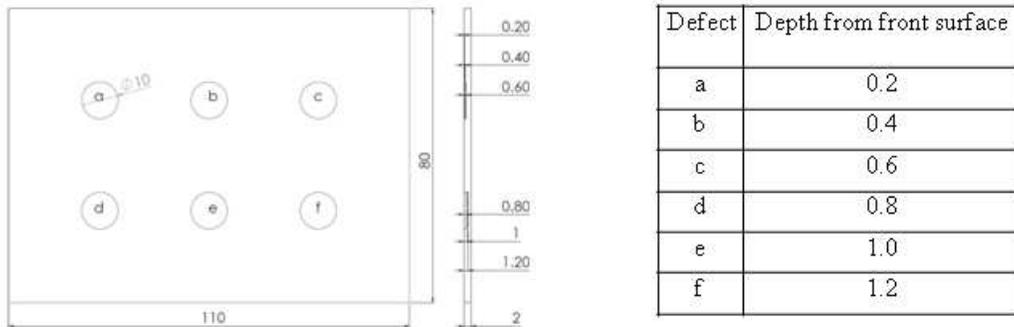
Top and cross-sectional view of simulated mild steel sample (all dimensions are in mm).
